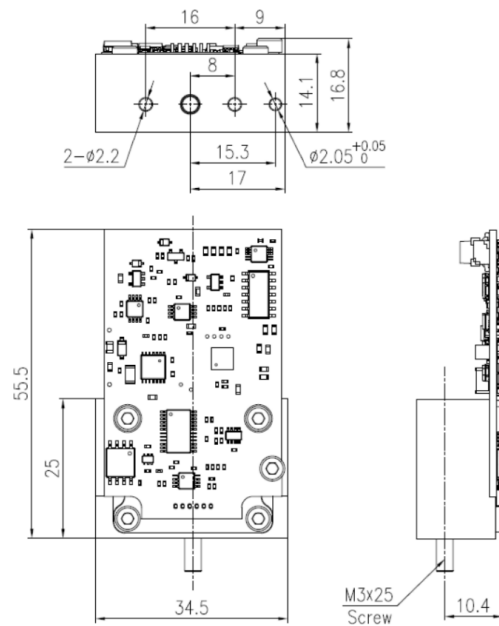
PFLOW5001, full scale of 200 sccm manifold mechanical dimensions.
